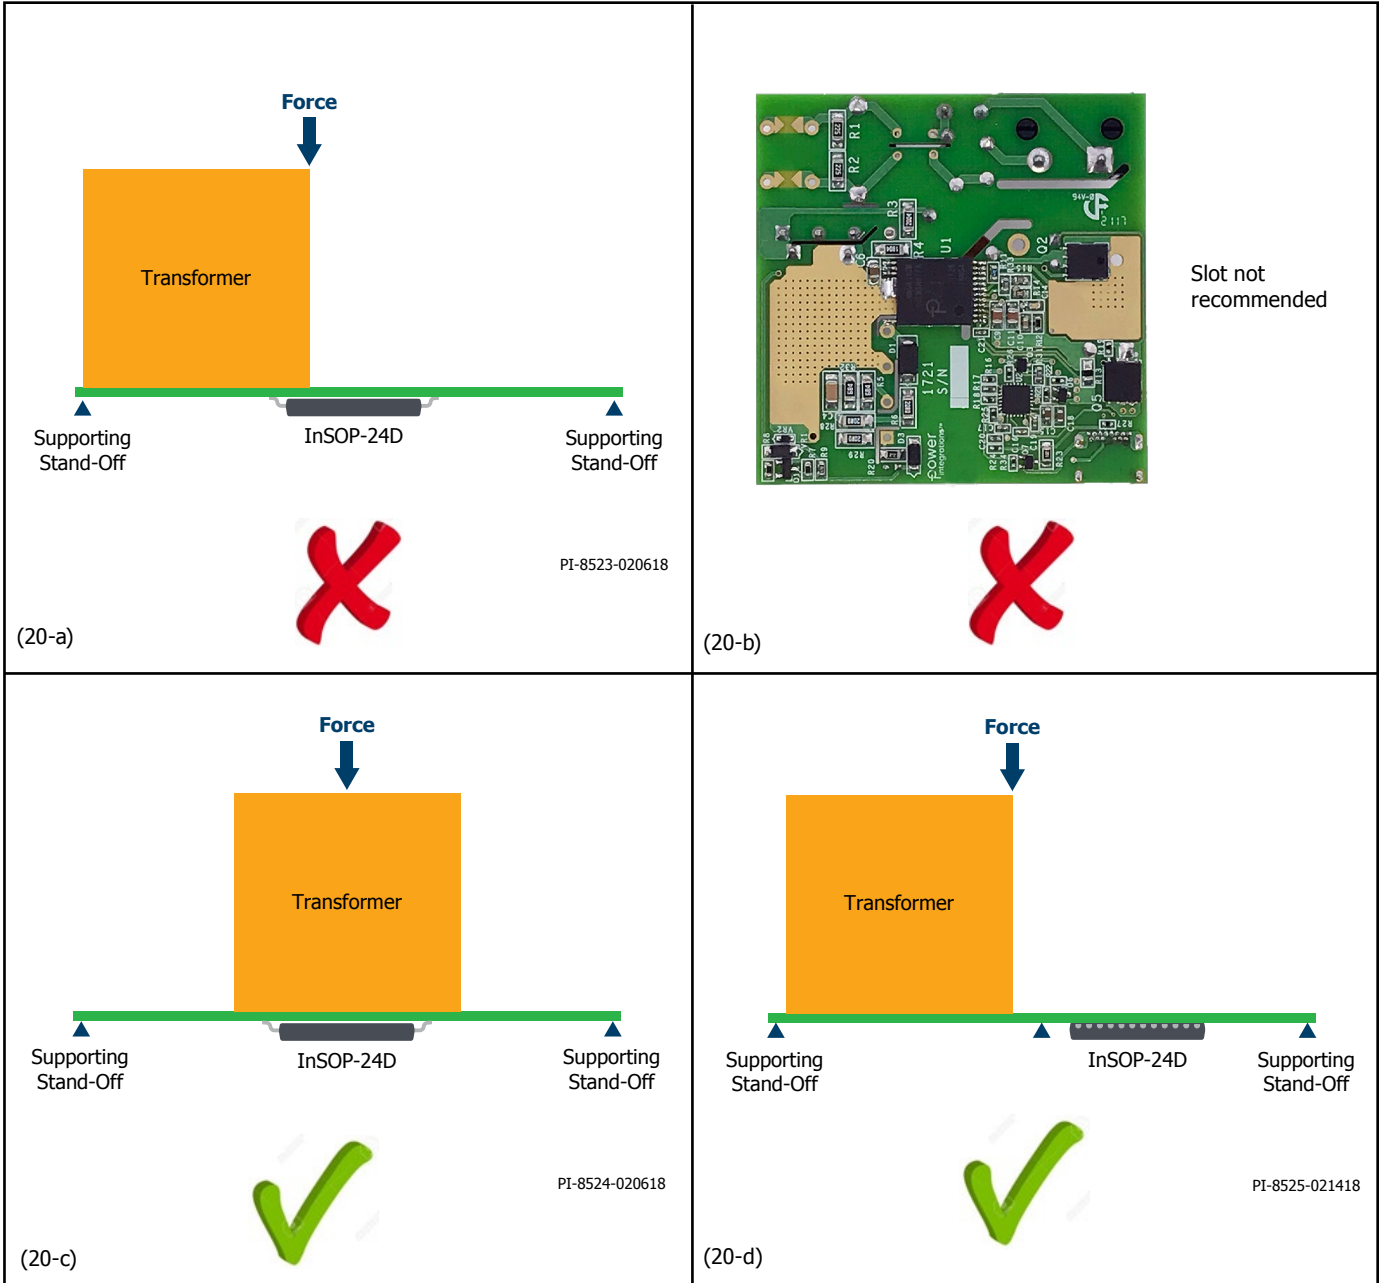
Recommended Position of InSOP-24D Package Shown with Check Mark.
